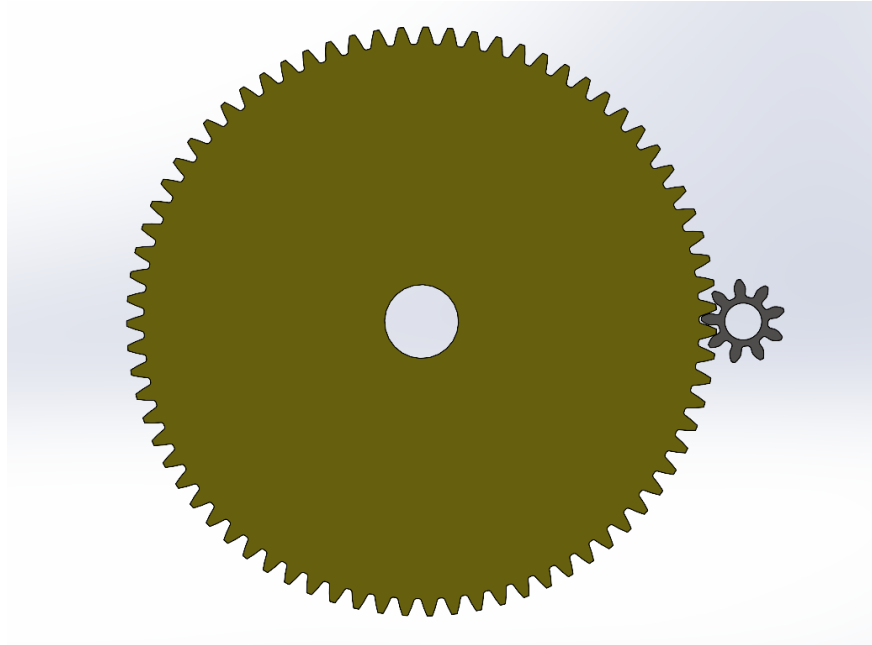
SolidWorks CAD gear model with a larger, yellow nylon spur gear meshing with a smaller steel spur gear
